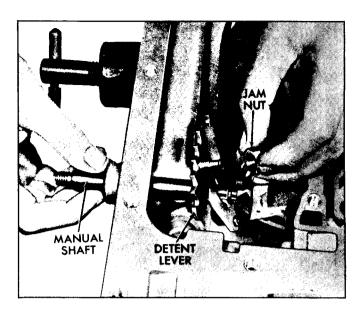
E-191 Installing Jam Nut onto Manual Shaft
